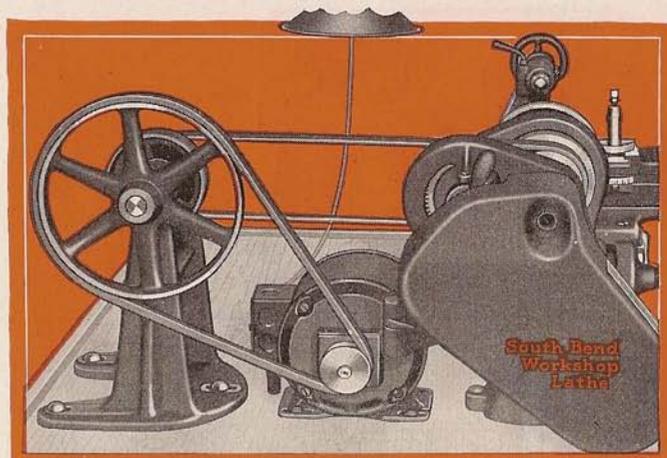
Headstock End View of the 9" x 3' No. 405-Y "Workshop" Horizontal V-Belt Motor Driven Bench Lathe as shown on page 4.
